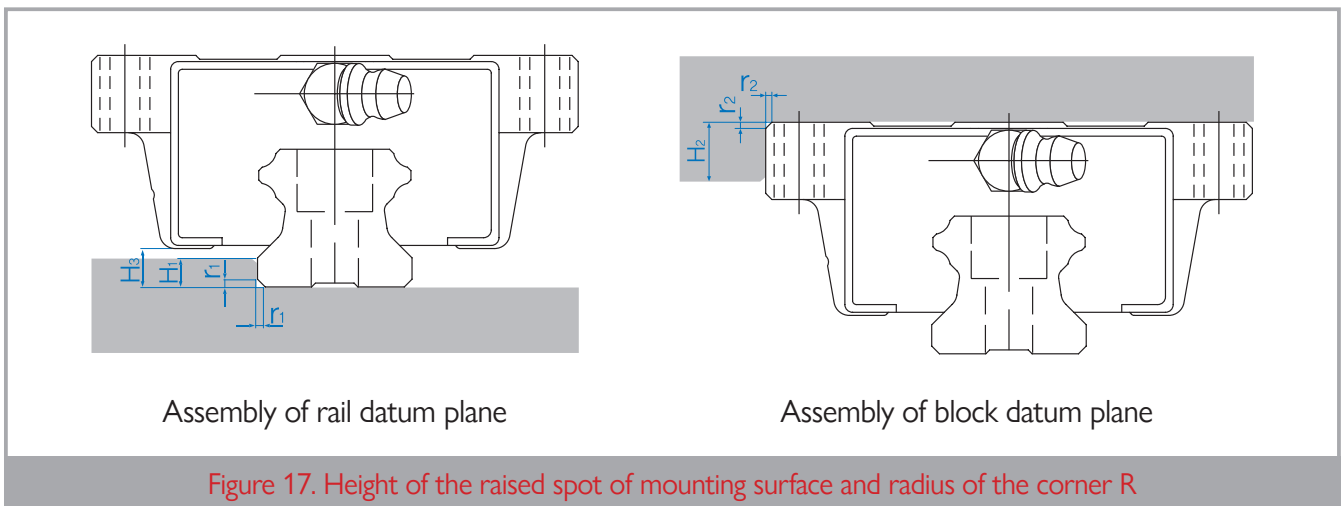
Height of the raised spot of mounting surface and radius of the corner R
